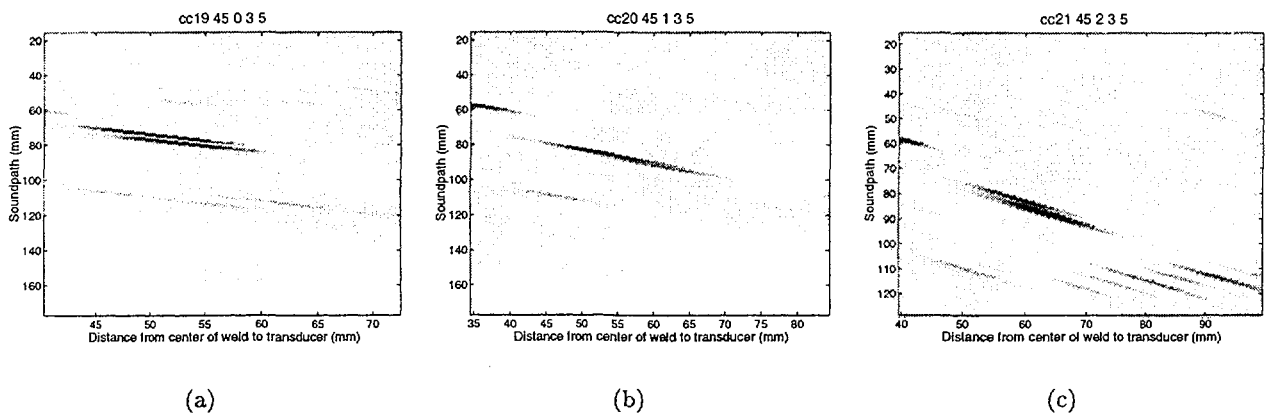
Indirect measurements from center cracks using the 45-degree 3.5 MHz transducer (a) 3 mm crack, 10 mm from bottom surface (b) 6 mm crack, 26 mm from bottom surface, tilted 2 degrees (c) 3 mm crack, 22 mm from bottom surface, 2 mm from center of weld, tilted 3 degrees.
